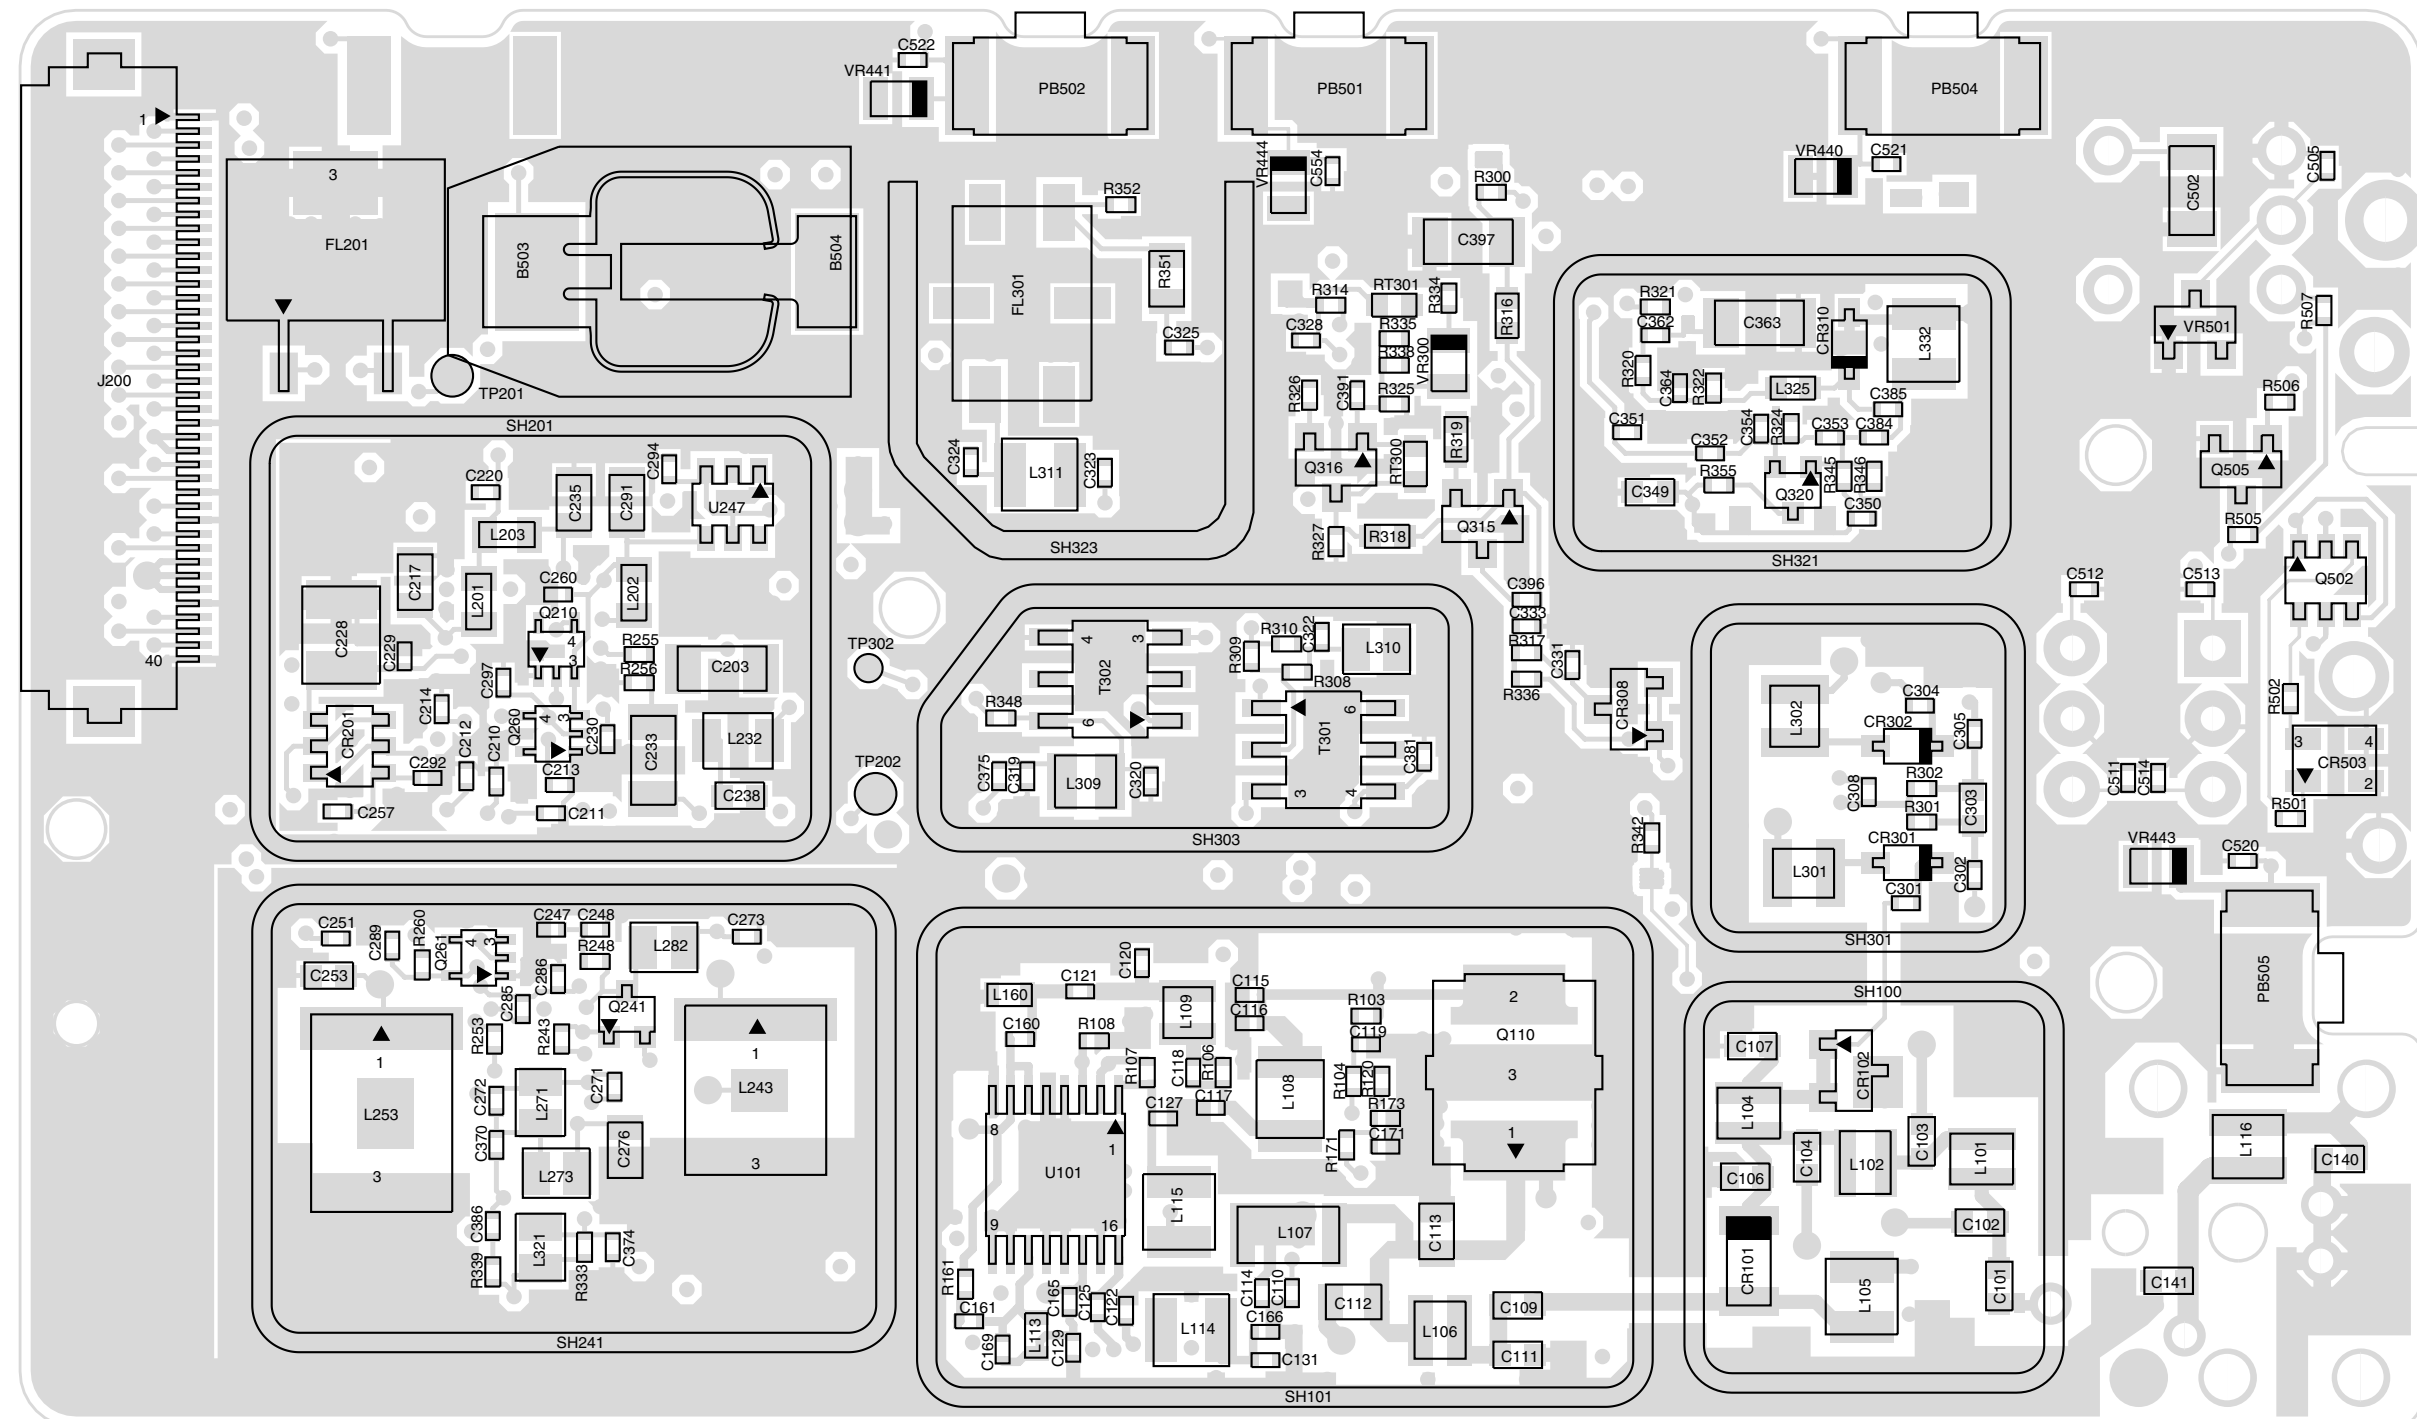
UHF (403-470MHz) Main Board Top Side PCB No. 8404077G01
